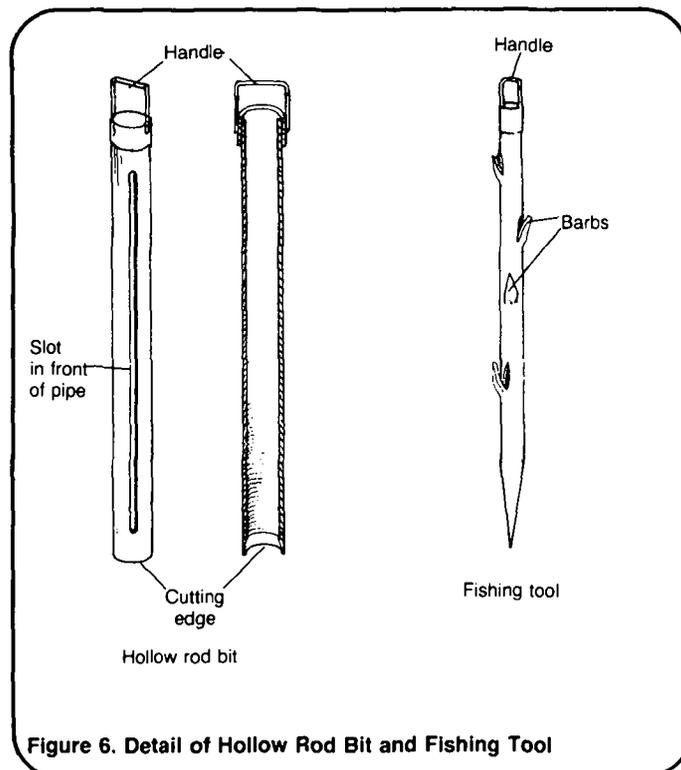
Detail of Hollow Rod Bit and Fishing Tool
